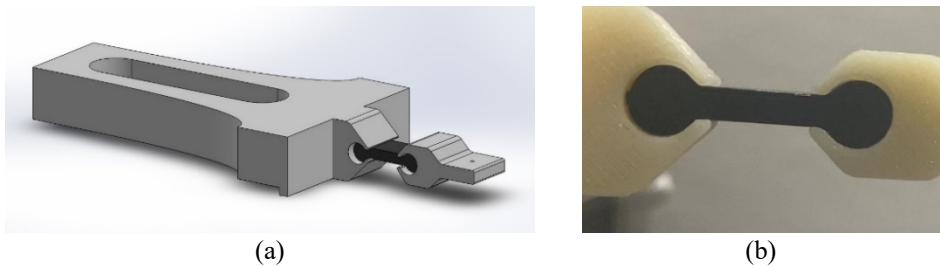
(a) Test bracket with NinjaFlex® specimen assembly; (b) Printed specimens.
